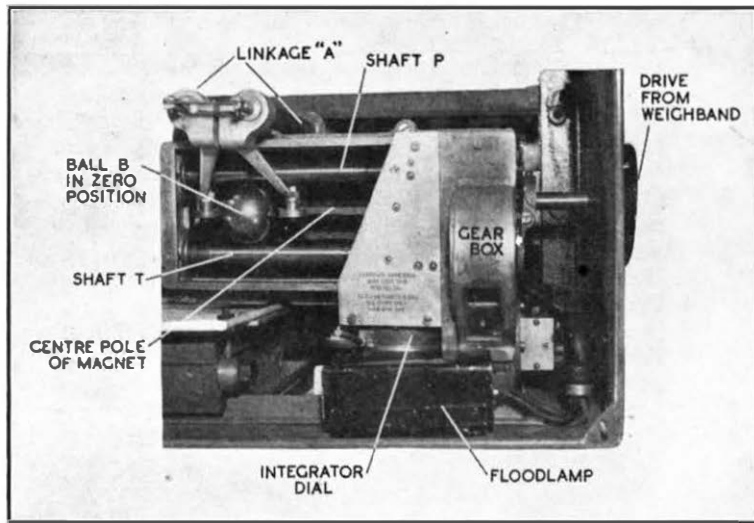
PLAN VIEW OF INTEGRATOR.
